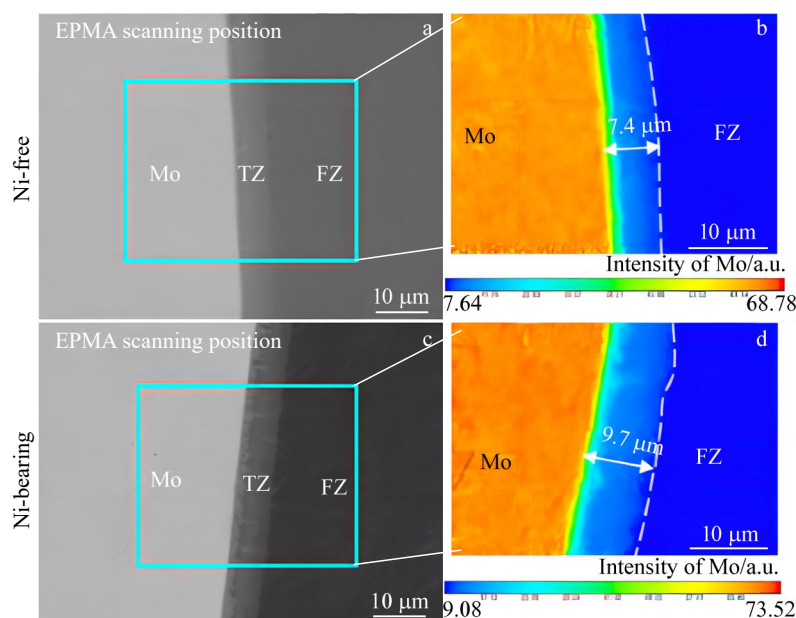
EPMA results for molybdenum/SUS304L laser welded Ni-free (a–b) and Ni-bearing (c–d) joints^[57]
